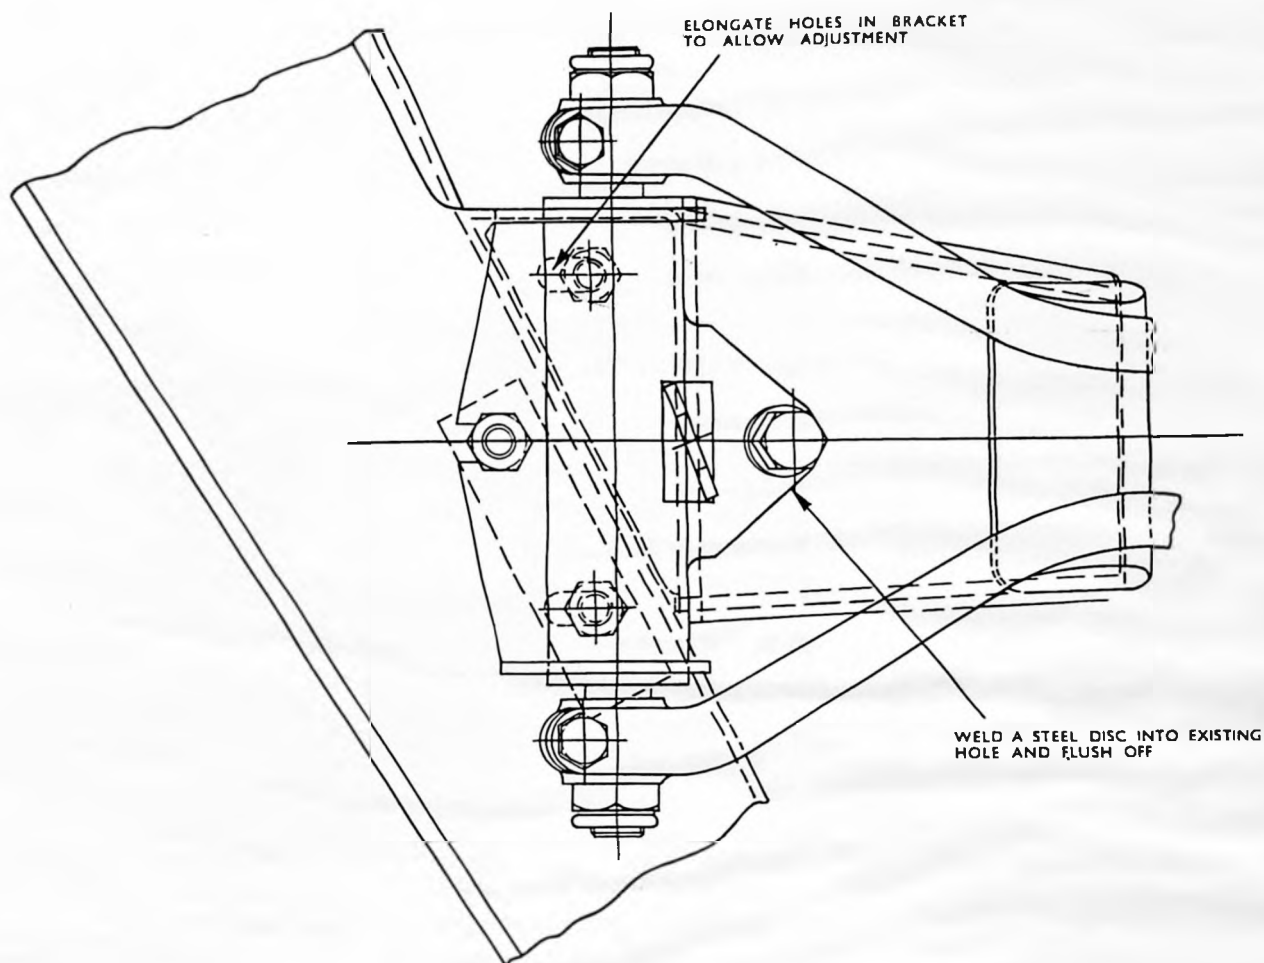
Plan View of Top Arm Front Suspension Chassis Bracket.
